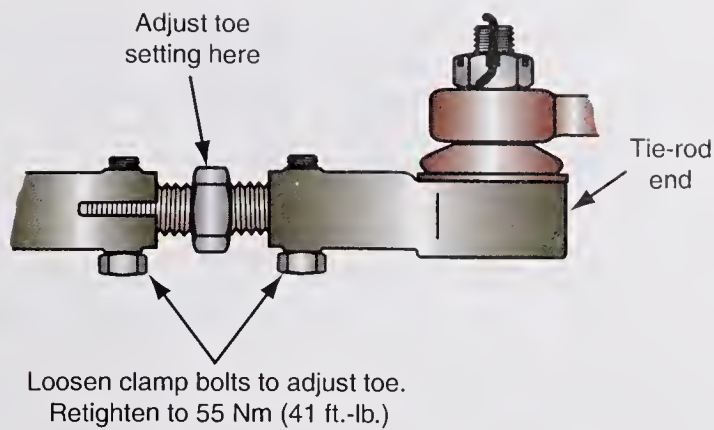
Rack and pinion steering gear with externally threaded toe adjuster and internal threads on the tie-rod and outer tie-rod end.
